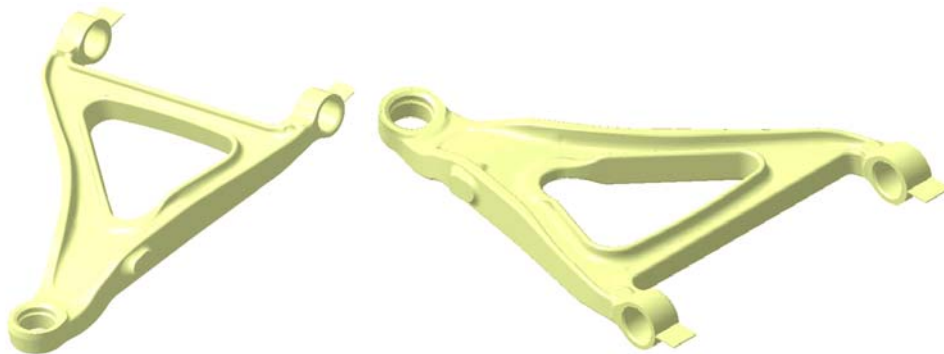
CAD geometry of the redesigned front lower suspension arm.
